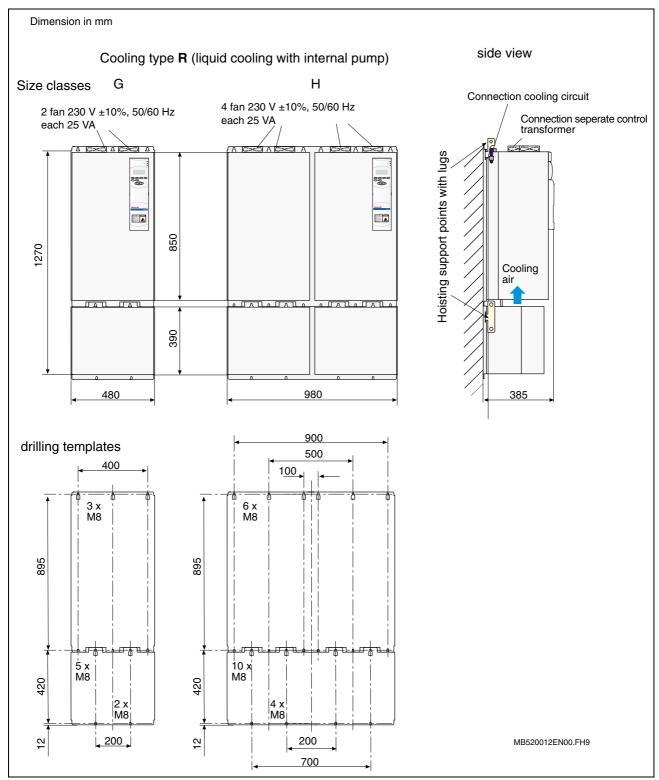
Dimension sheet of converter, size classes G and H, with cooling type R
